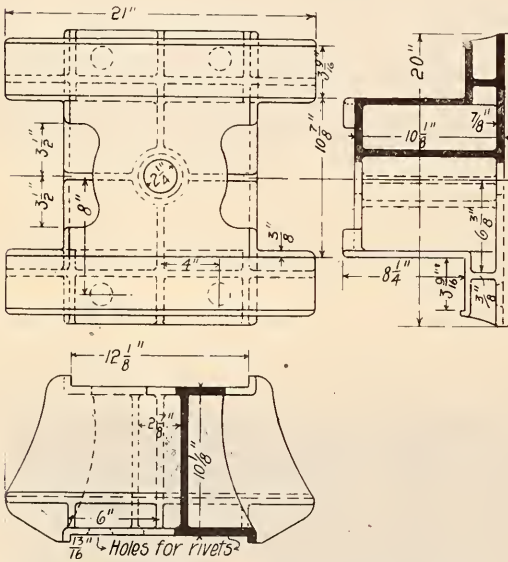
BODY BOLSTER SPIDER, C., M. & ST. P. RY., COAL CAR.
